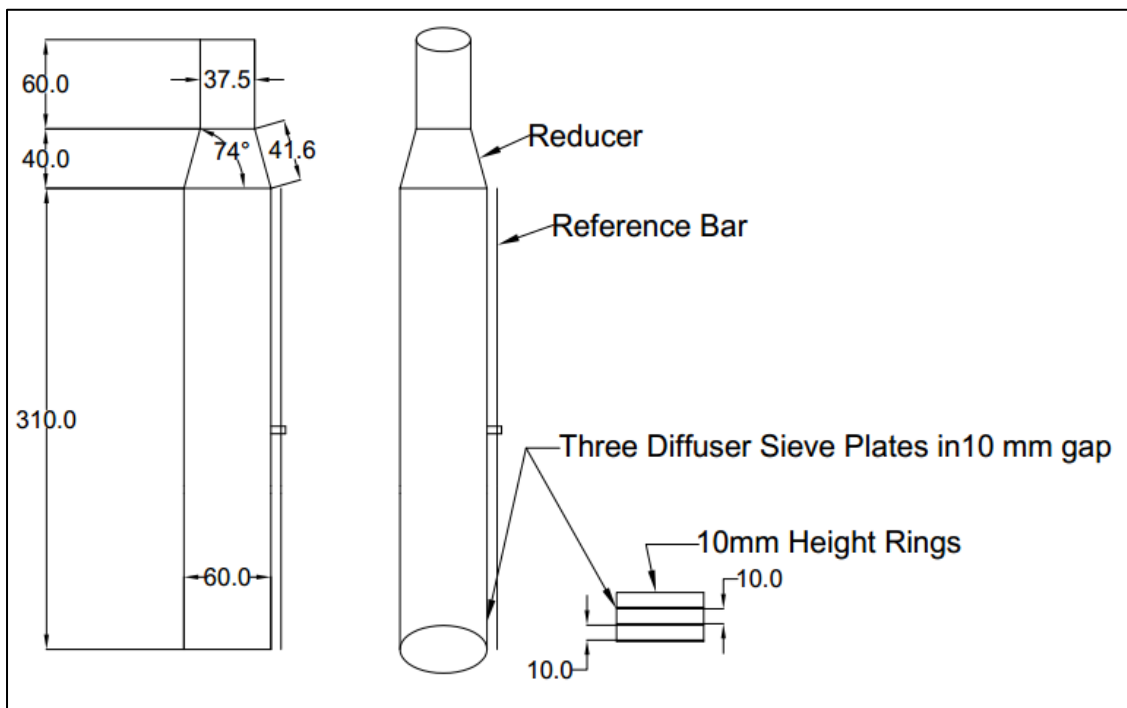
Schematic Diagram of Rigid Tube and Diffuser Sieves Pattern (All Dimensions in mm)
